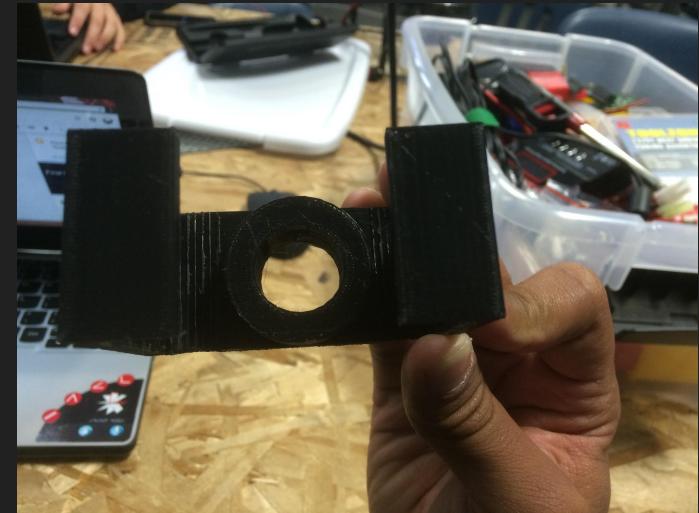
3D-Printed Electromagnet Holder-Mk 3-Top View
